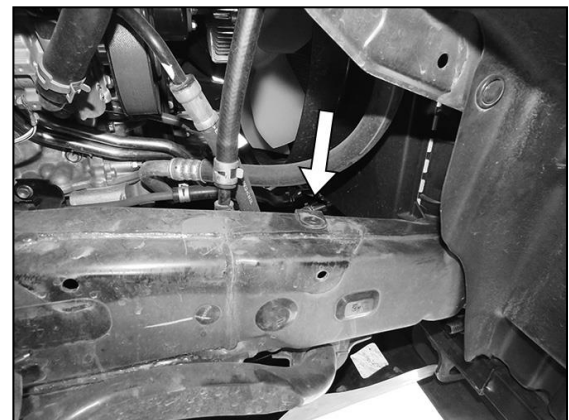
Remove the bolts attaching the cooler to the top of the crossmember, if equipped (driver/left side pictured)
